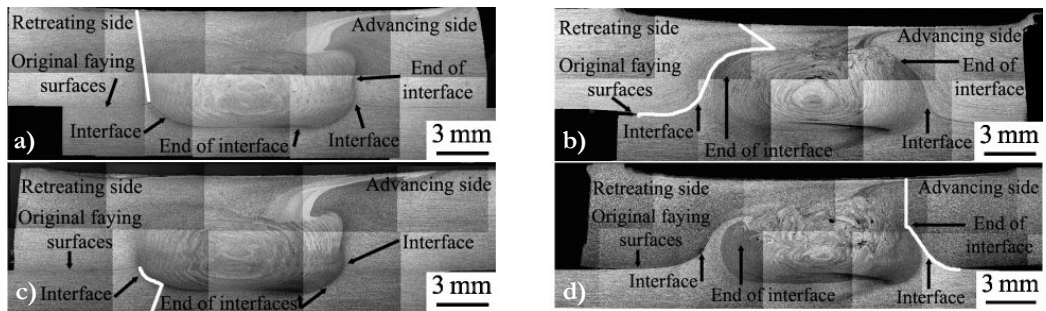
Macrographs of joint cross sections welded by different tools. a) Right-hand Skew-stir tool joint b) Right-hand conventional threaded pin tool joint c) Left-hand Skew-stir tool joint d) Left-hand conventional threaded pin tool joint [11].
